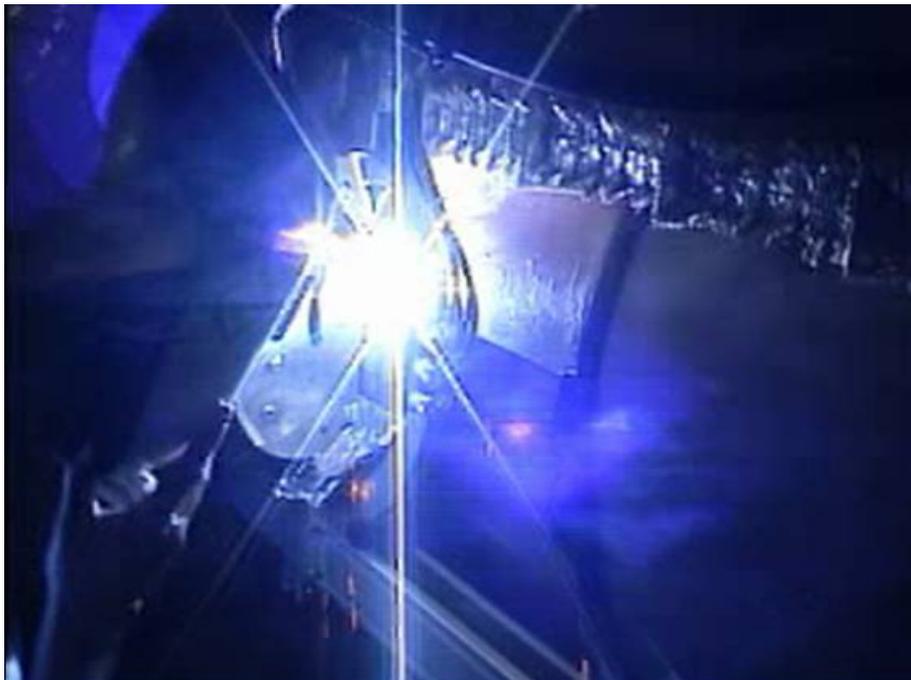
System Welding Longitudinal Fillet on Retaining Sleeve
